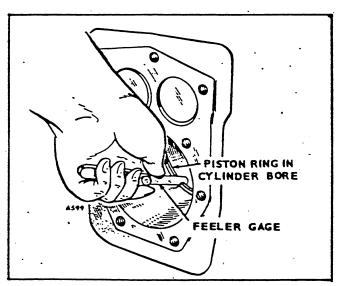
FITTING PISTON RINGS TO CYLINDER
